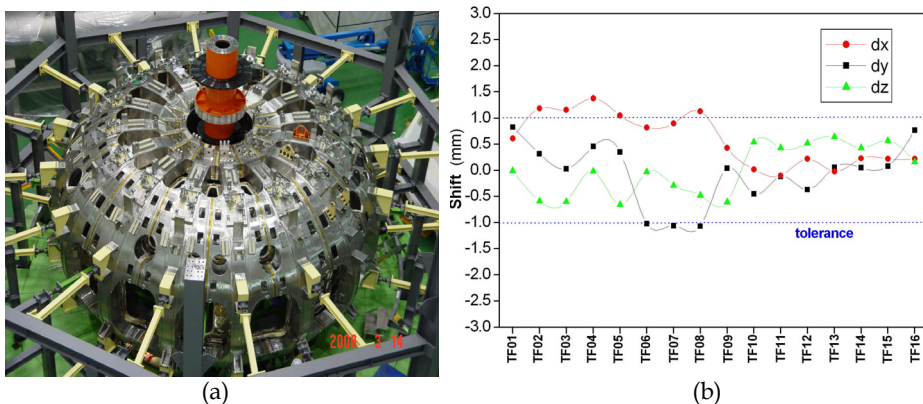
TF magnet assembly qualification. Completion of whole TF magnet assembly (a) and installation error of TF magnet within 1 mm in the parallel shift (b).
